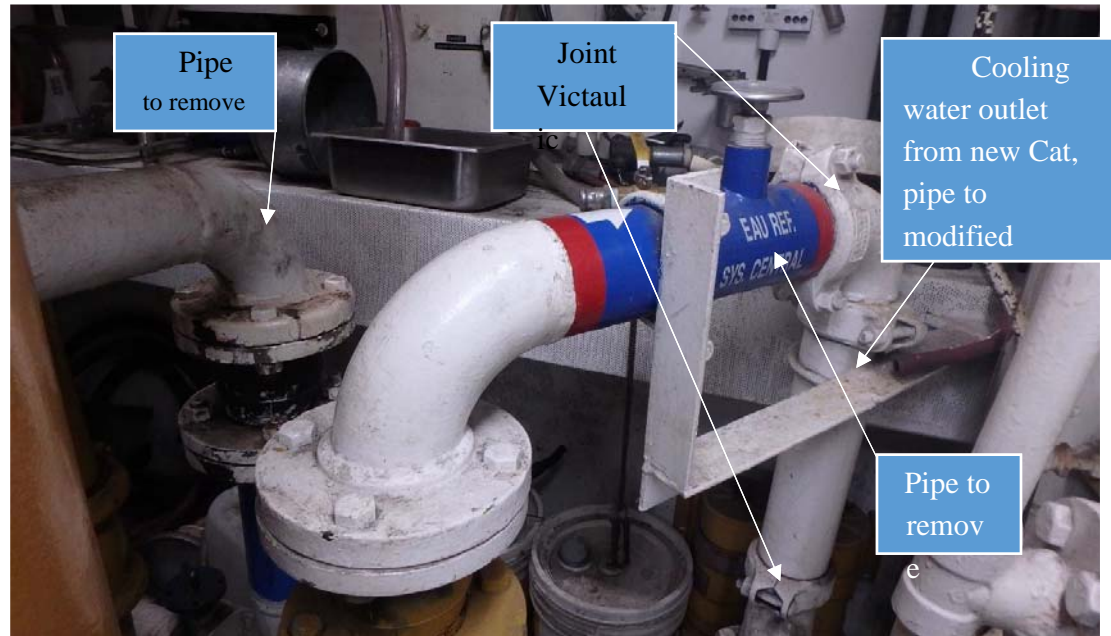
Cooling water pump piping outlet view, engine heat exchanger outlet
